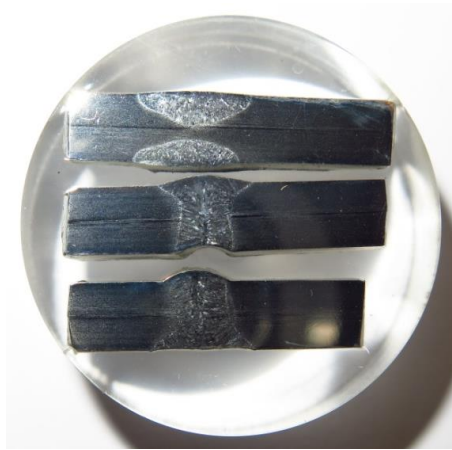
Macro-sections of weld joints welded by current 150 A; a) TIG-5, b) ATIG-B5, c) ATIG-Z5
